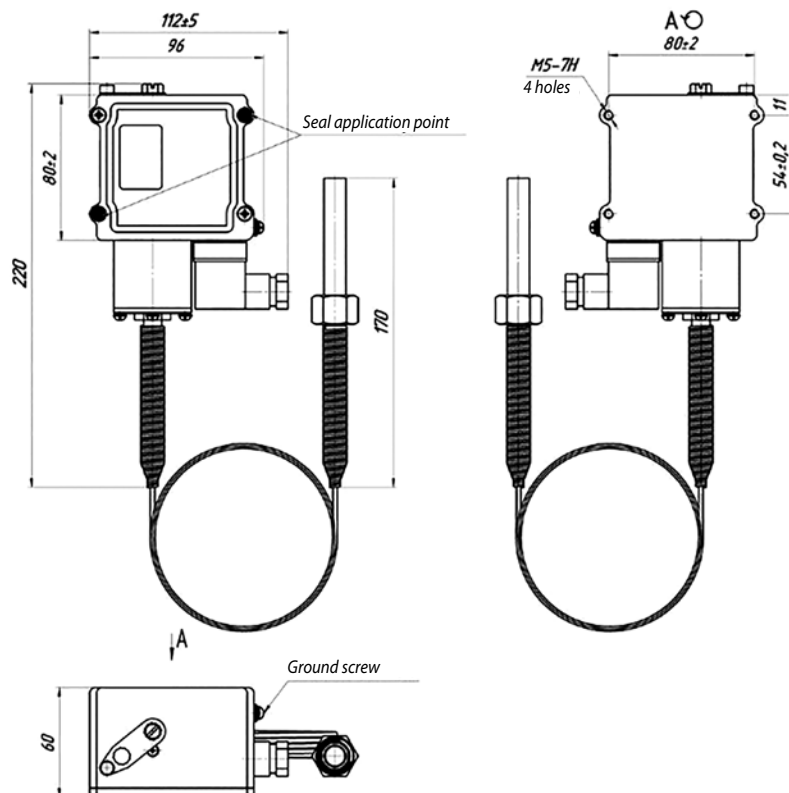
Overall and mounting dimensions of TAM-102C temperature relay-sensors with setpoint range "4", "5" with EN 175301-803 connector
